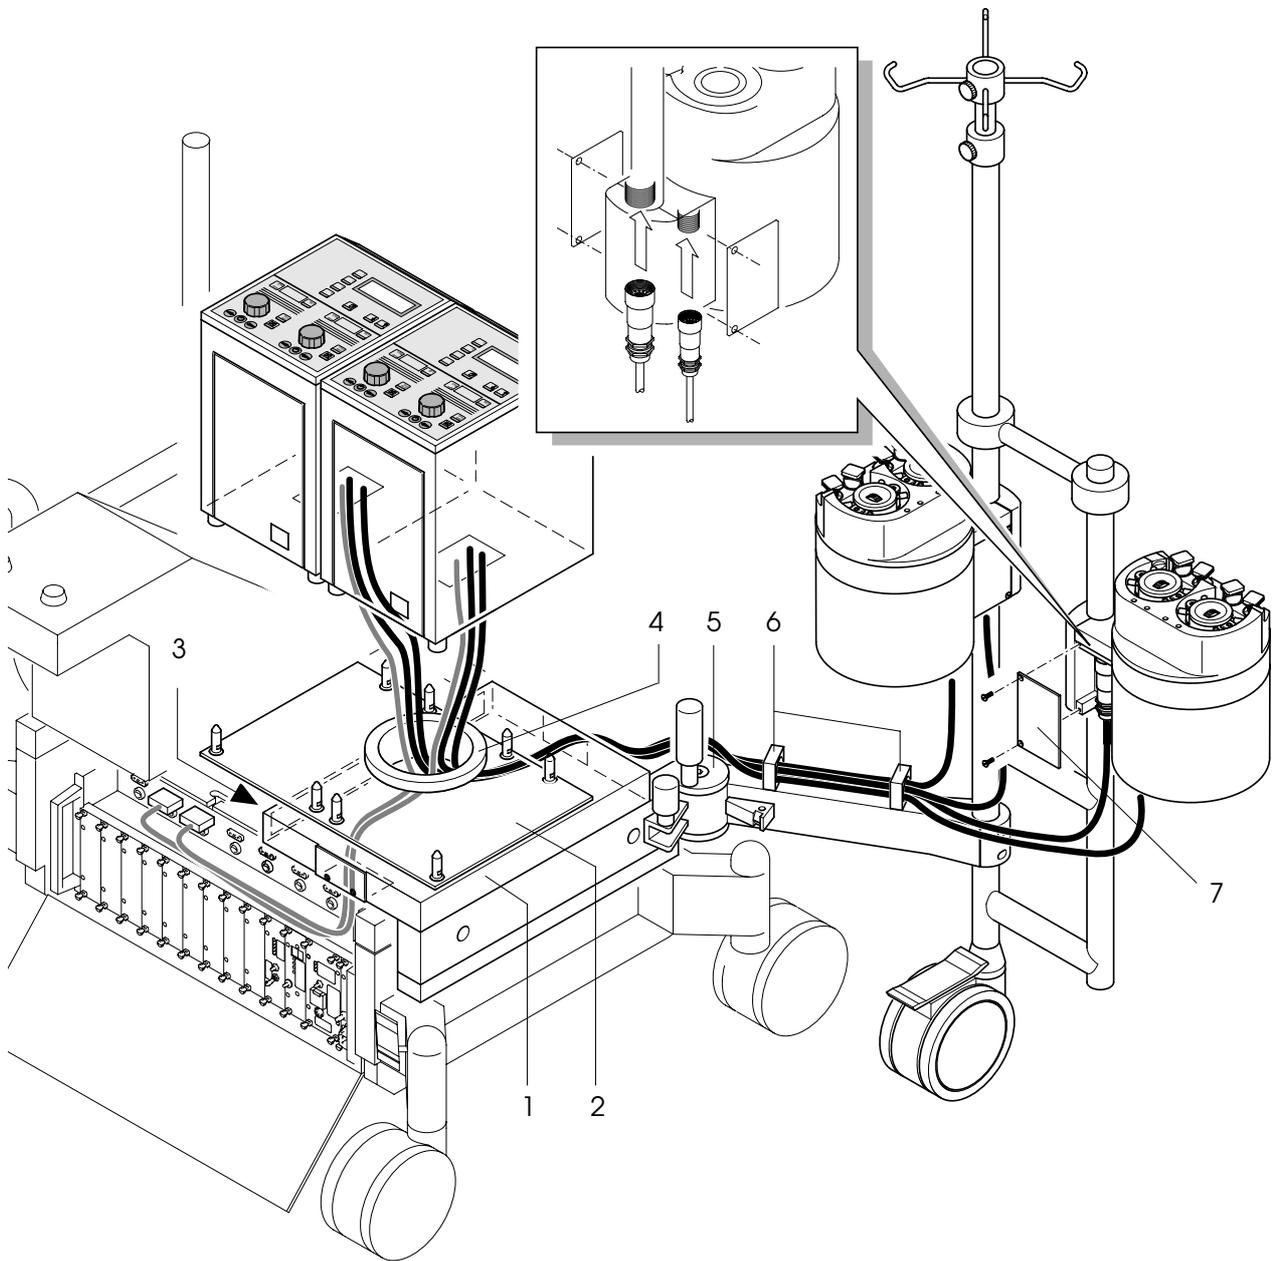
Double Head Pump, mast-mounted: Running of connecting cables
